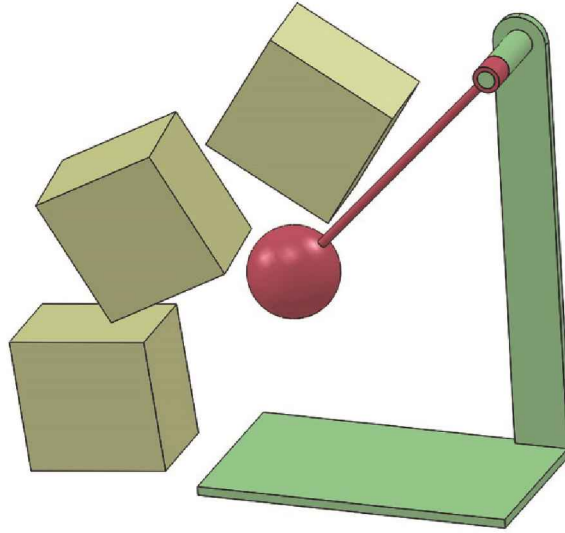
WRECKING BALL assembly analyzed with SolidWorks Motion.
